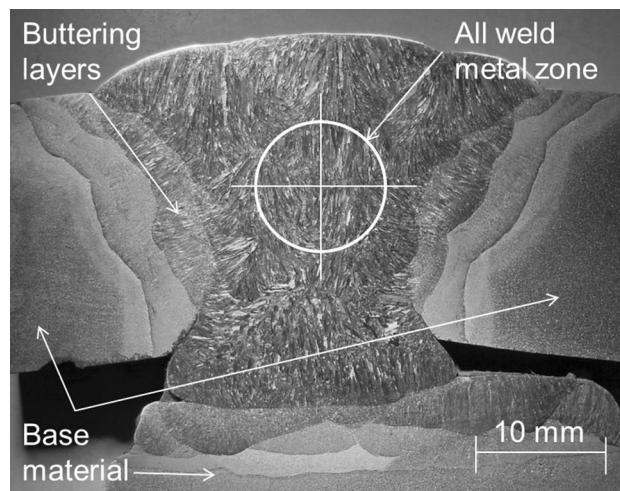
Transversal cut of all-weld metal coupon
